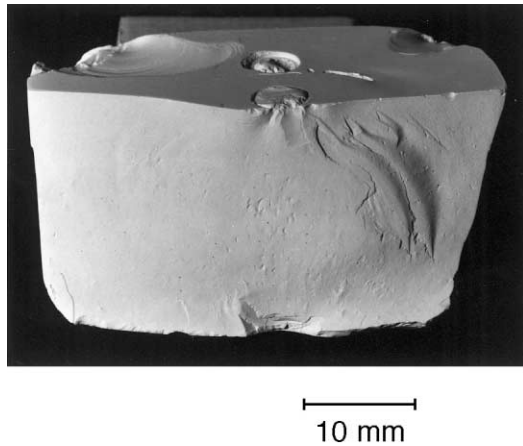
Fracture surface of a 20-mm thick moulding broken after binder removal free of the concentric crack pattern.
